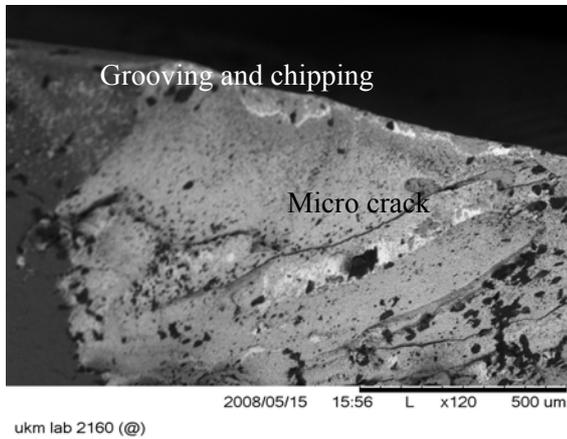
Chipping and grooving on the flank face when machining at cutting speed of 180 m/min, feed rate of 0.4 mm/tooth and depth of cut of 0.9 mm
